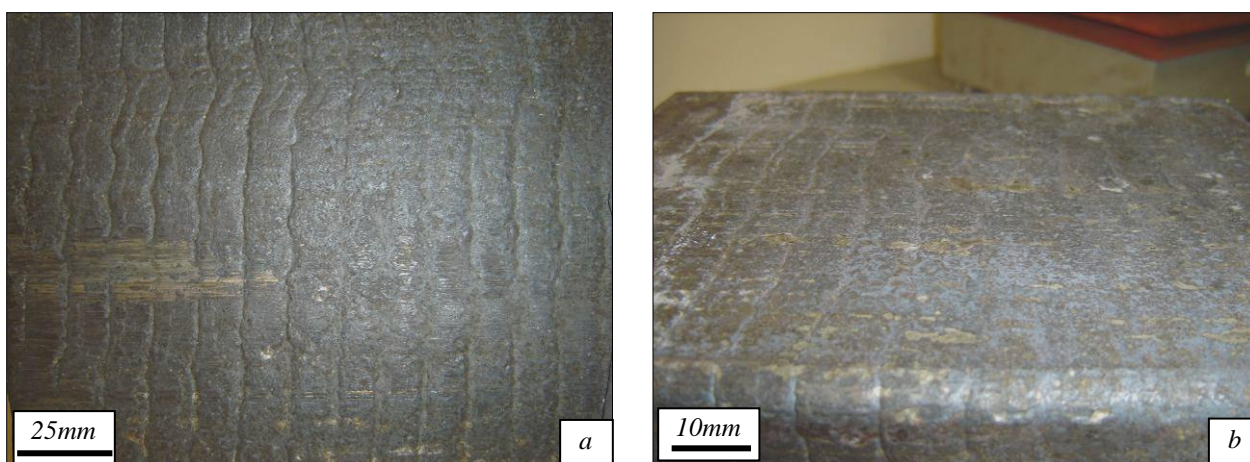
Photographs showing an as cast scale on type 304 stainless steel from a) plan view and b) from a corner
